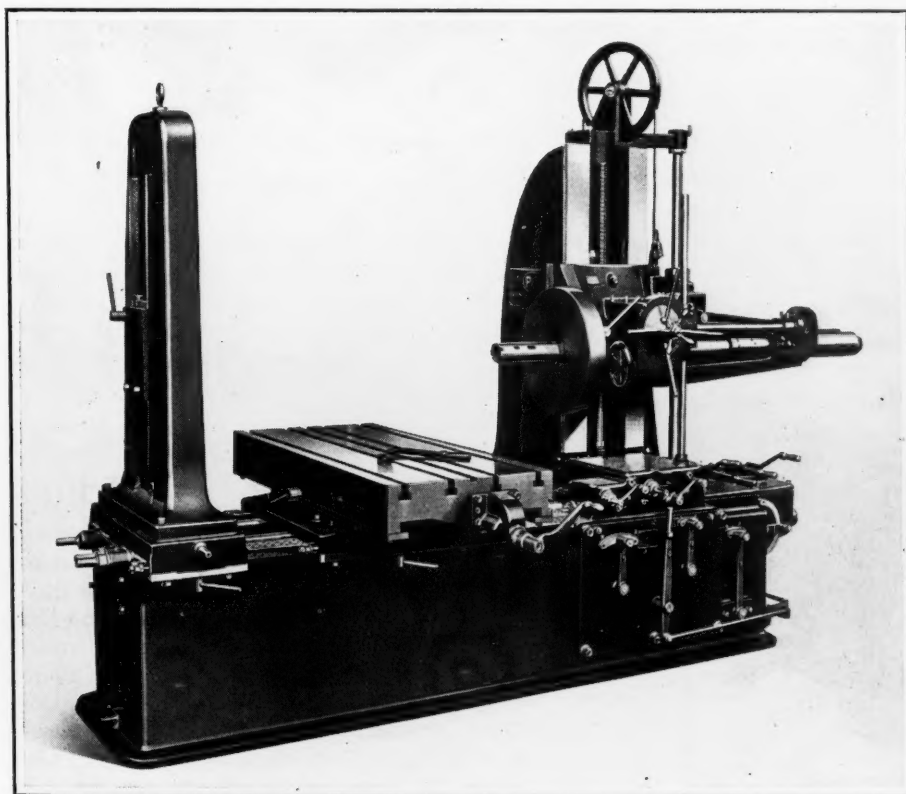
No. 3T Horizontal Boring, Drilling, and Milling Machine brought out by the Pawling & Harnischfeger Co.
